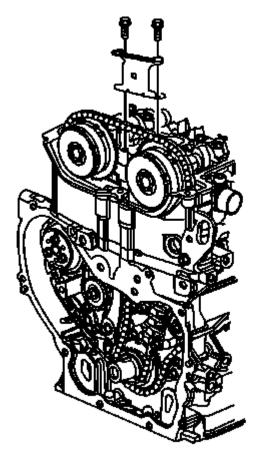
Timing Chain Guide Access Hole Plug & Washer Courtesy of GENERAL MOTORS COMPANY
